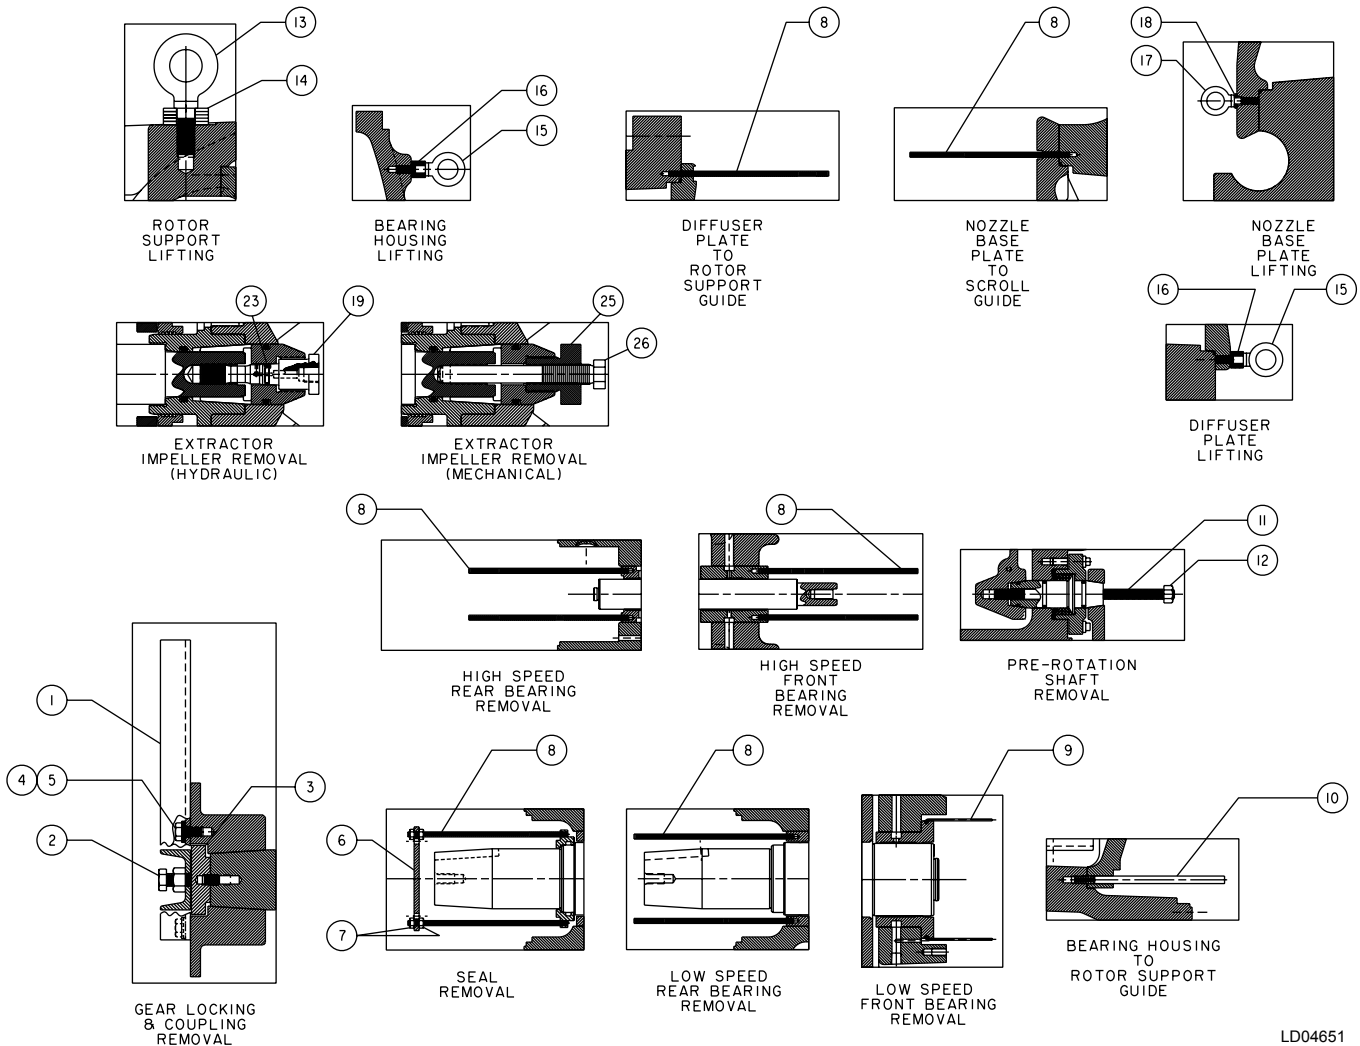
USE OF COMPRESSOR TOOLS (-46, -50, -57, -59, -61)
